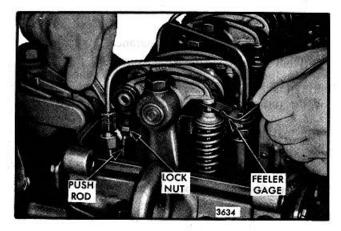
Adjusting Valve Clearance (Two Valve Head)
